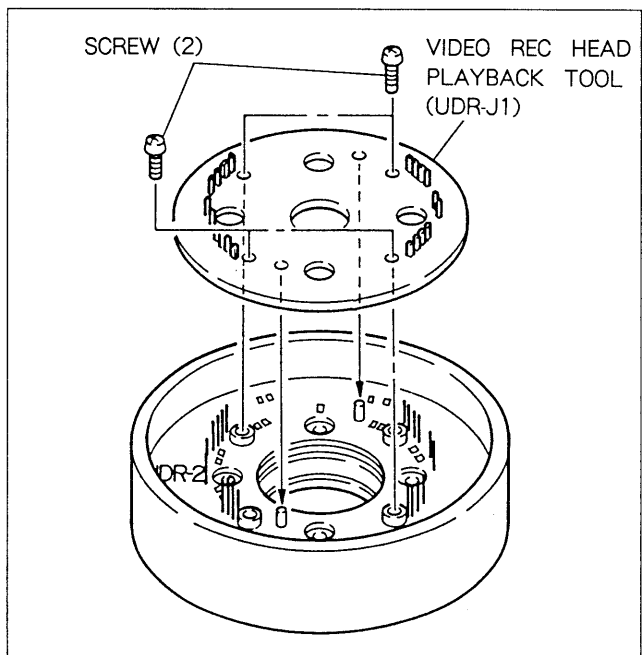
Video REC Head Playback Tool Installation (2)
